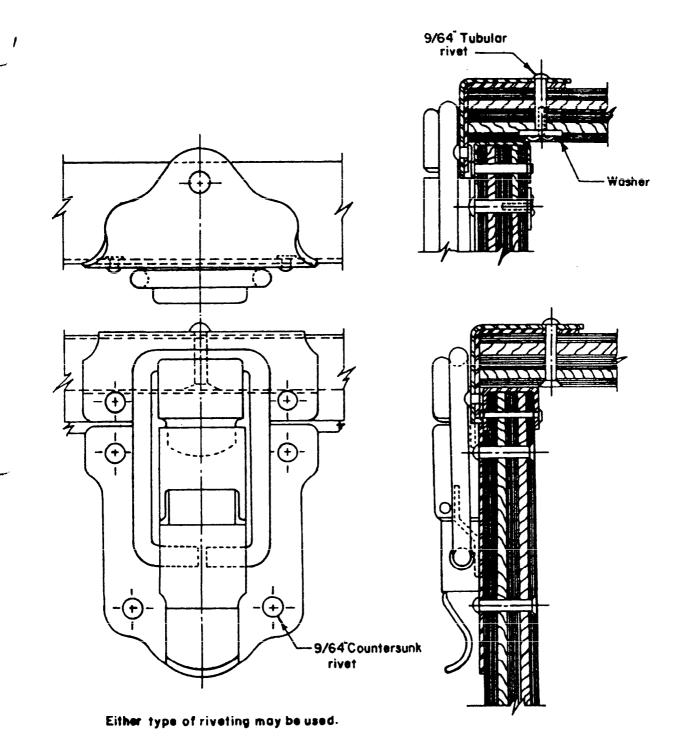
METHOD OF JOINING DRAWBOLT TO PLYWOOD
